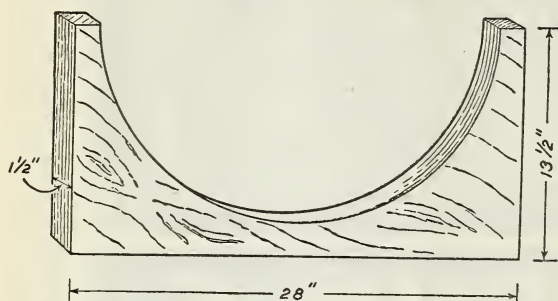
Size and shape of one of the boards of which the base is constructed
